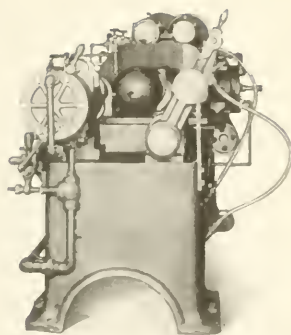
End View of Warren "Hydraulic" Lathe for turning Large Shells
